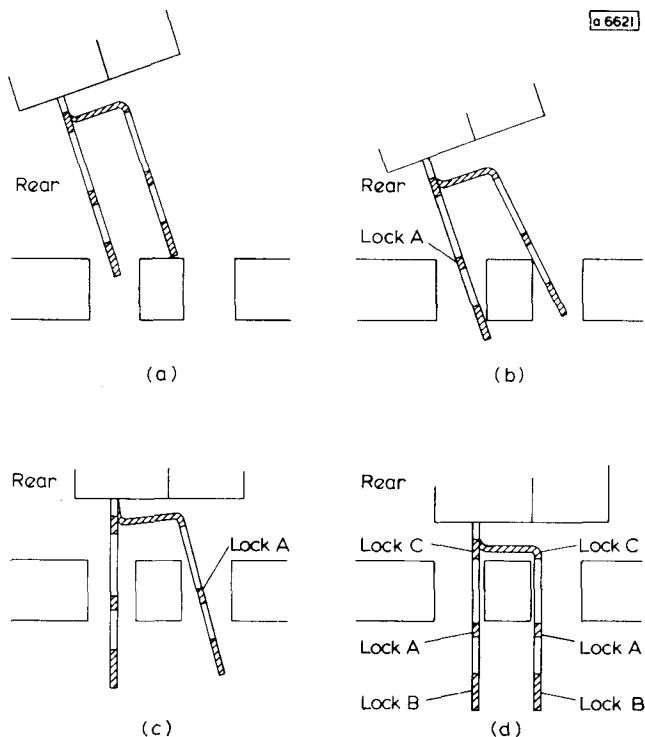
Mounting procedure for "Lockfit" transistors using e-grid printed-wiring boards; procedure is similar for e-grid boards
